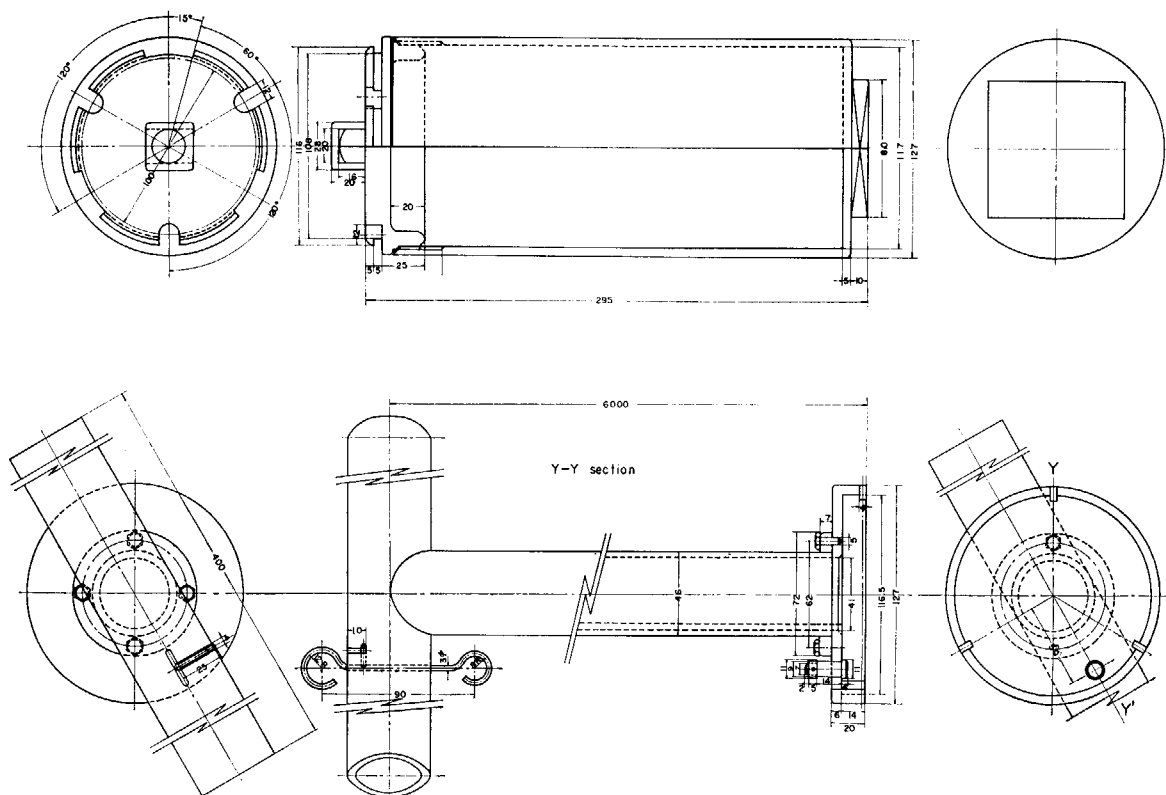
Handling tool for rotating lid of ruptured fuel can
